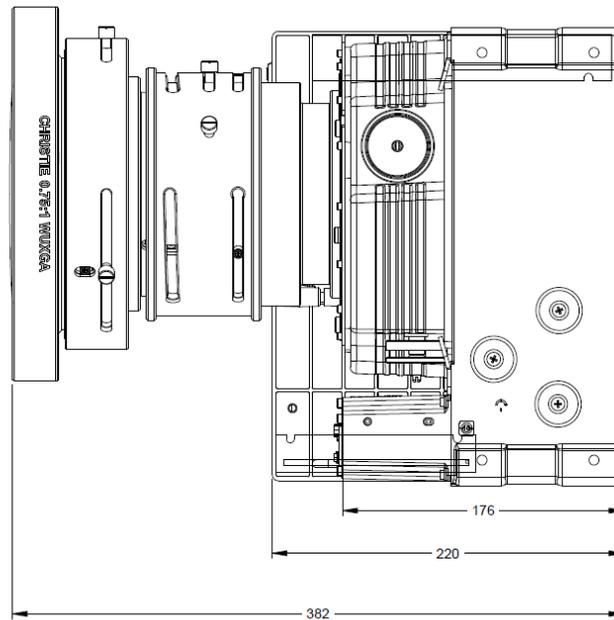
Mirage WU-L Side Dimensions with 0.75:1 Lens
